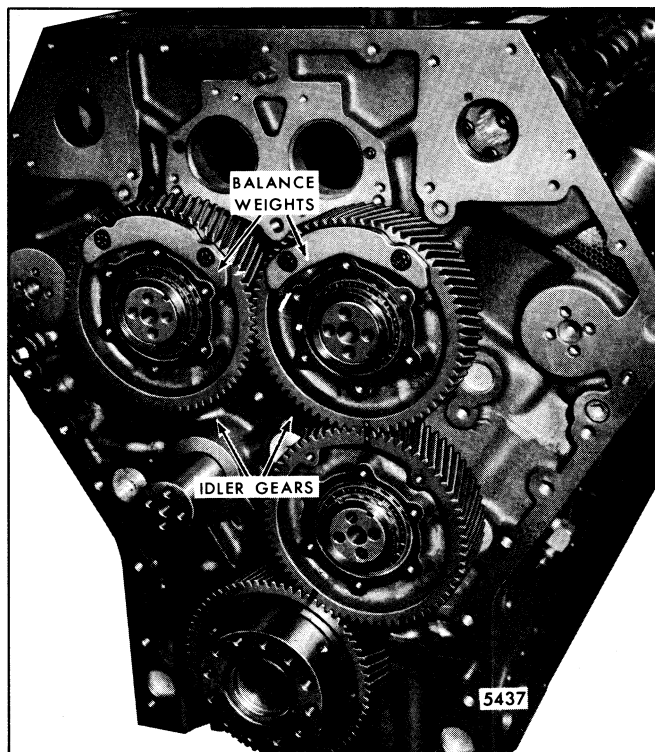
Typical Balance Weights on Rear Idler Gears
